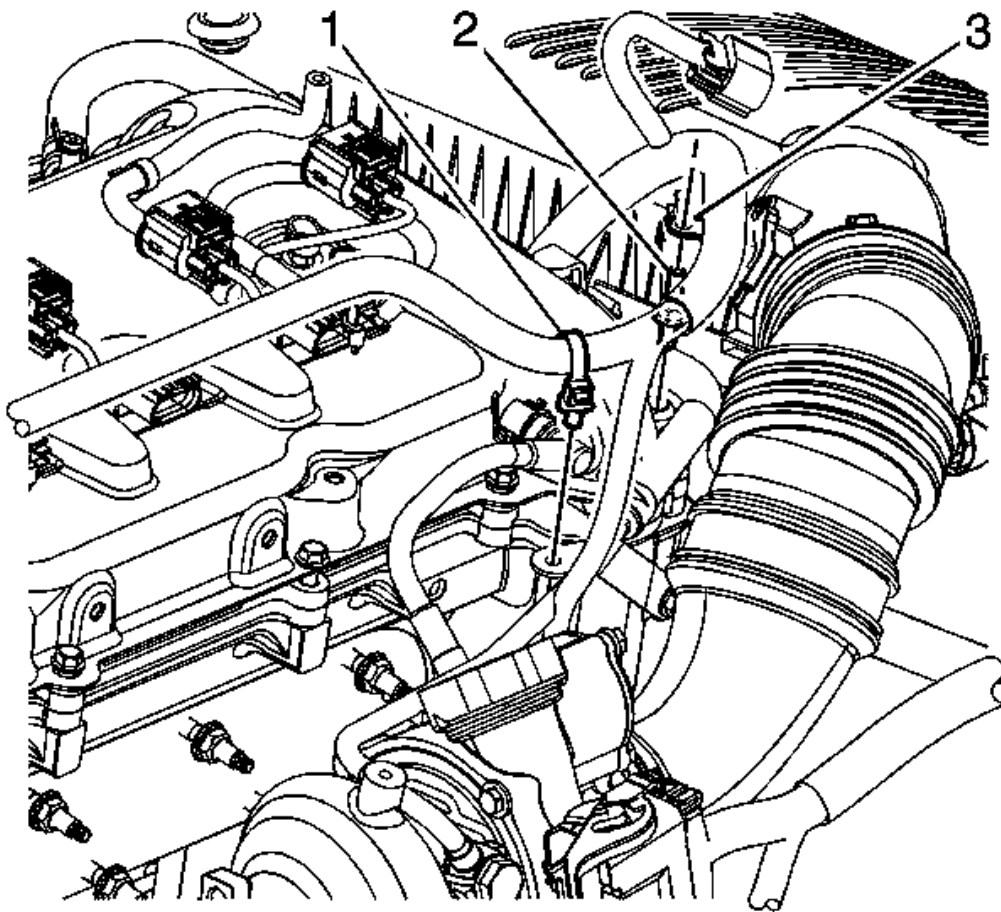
View Of Turbocharger Coolant Feed Pipe Clips & Studs
